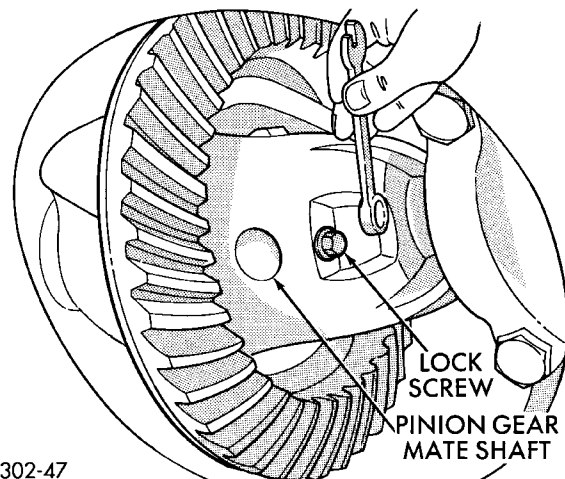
Pinion Gear Mate Shaft Lock Screw
